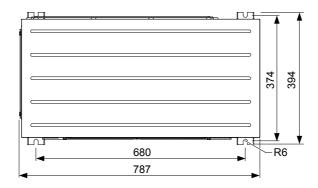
Installation hole dimensions of standard outdoor unit base (top view, unit: mm)
